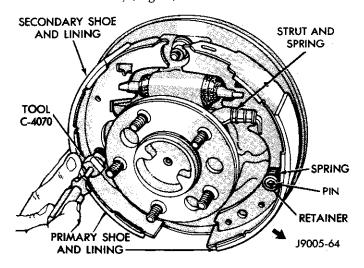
Removing/Installing Shoe Retainers, Springs and Pins
